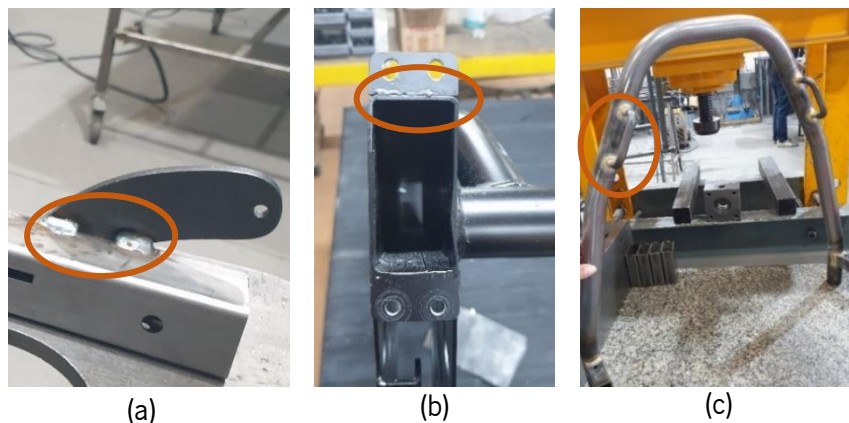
Different types of welding: (a) MIG; (b) TIG; (c) oxyacetylene.
